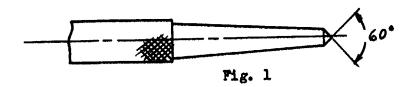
Shows how the point of a center punch should be ground. The angle is 60: The taper will be about 30
